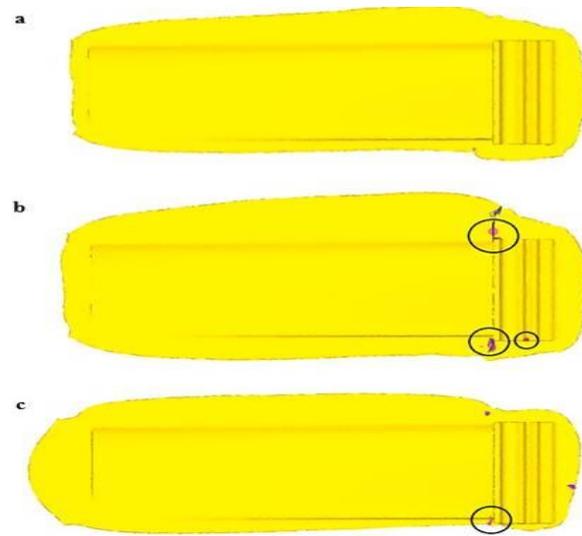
Flash value and defects a) modified 0.1 v preform forging b) 0.1 v preform forging c) oval preform forging
